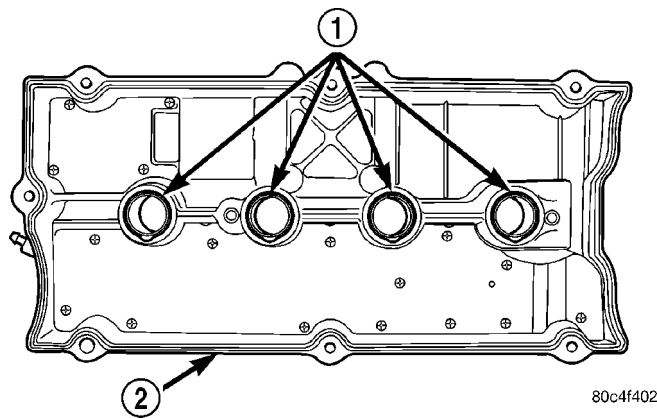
Cylinder Head Cover Gasket and Spark Plug Well Seals
